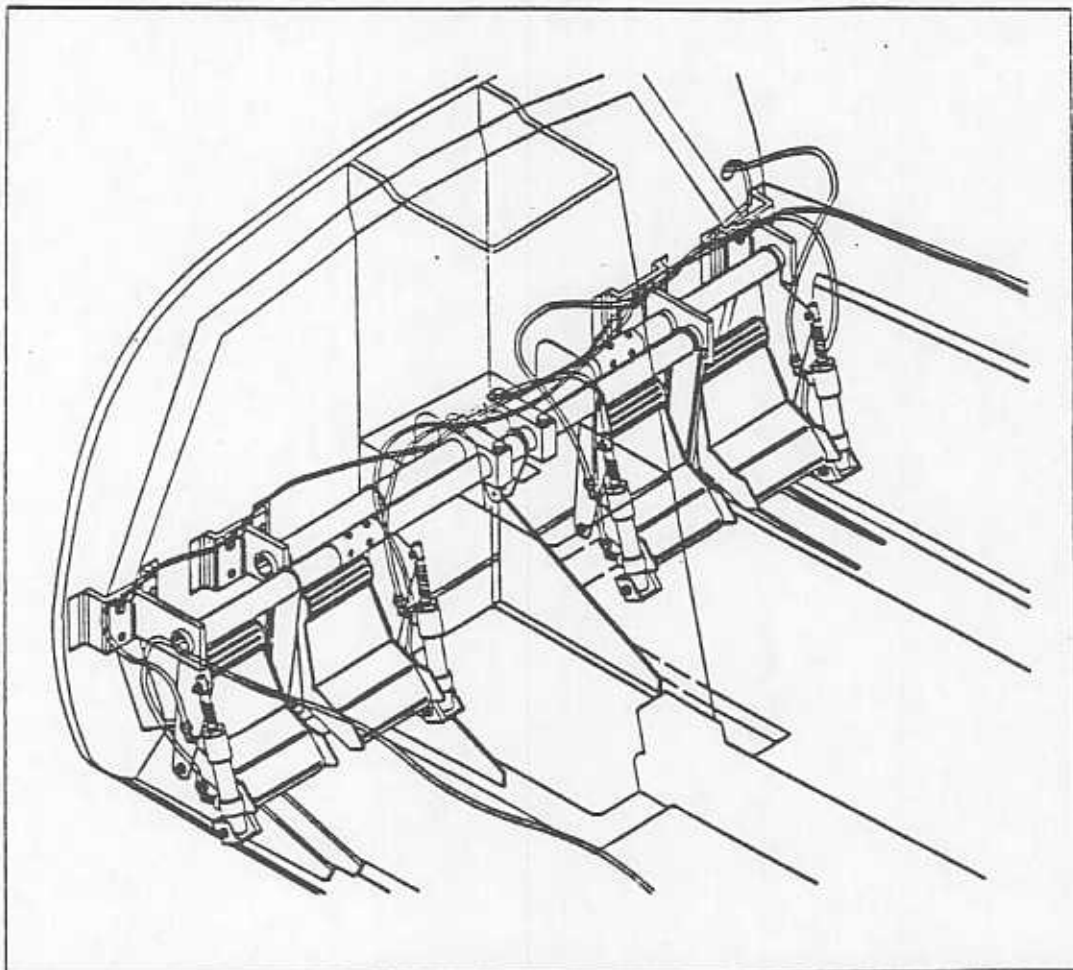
RUDDER PEDAL AND MASTER CYLINDER ASSEMBLY
